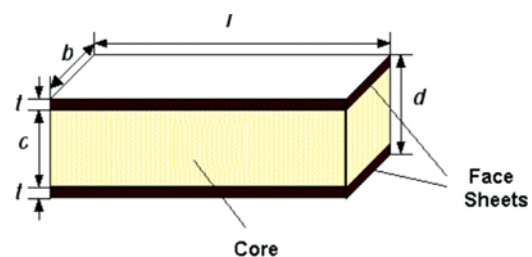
Dimensions of the sandwich specimen. (Color figure available online.)
